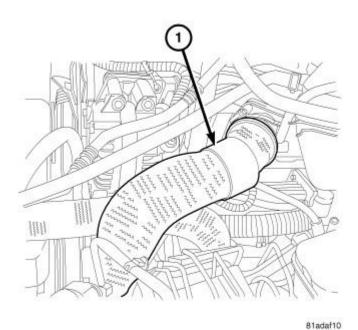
Charge Air Cooler Outlet Hose Courtesy of CHRYSLER LLC
